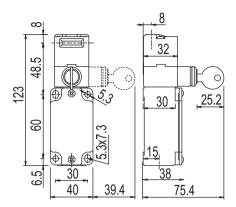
Dimensions of L10-M3C1-M20-KO in mm
